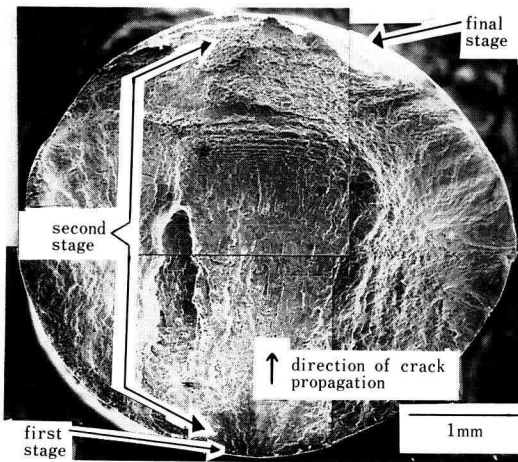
Macroscopic aspect of fracture surface observed by SEM.
